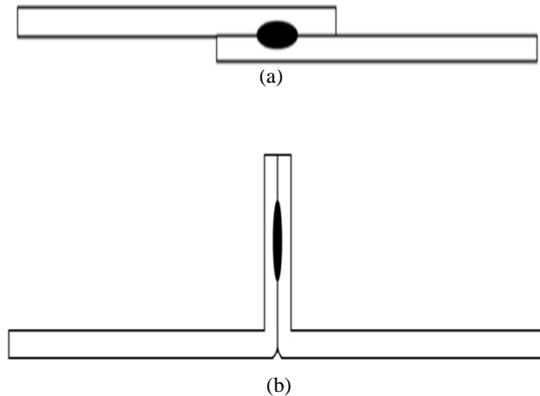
Geometry of the test samples applied; (a) lap-shear joint and (b) peel joint.
